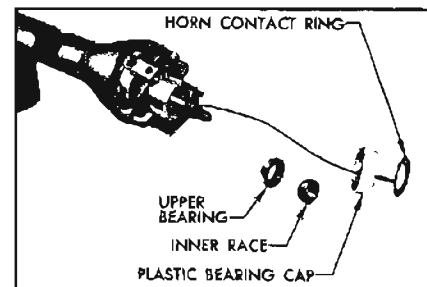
Removing Inner Race and Upper Bearing from Upper Portion of Mast Jacket
